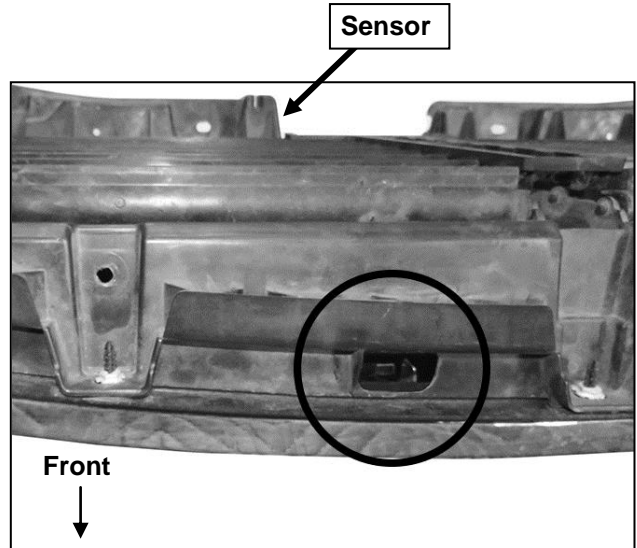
F-150 Models. Attach Relocation Bracket and sensor to previously drilled holes. (2) Bolts are preferred, Bracket installed with (1) Bolt for example only
